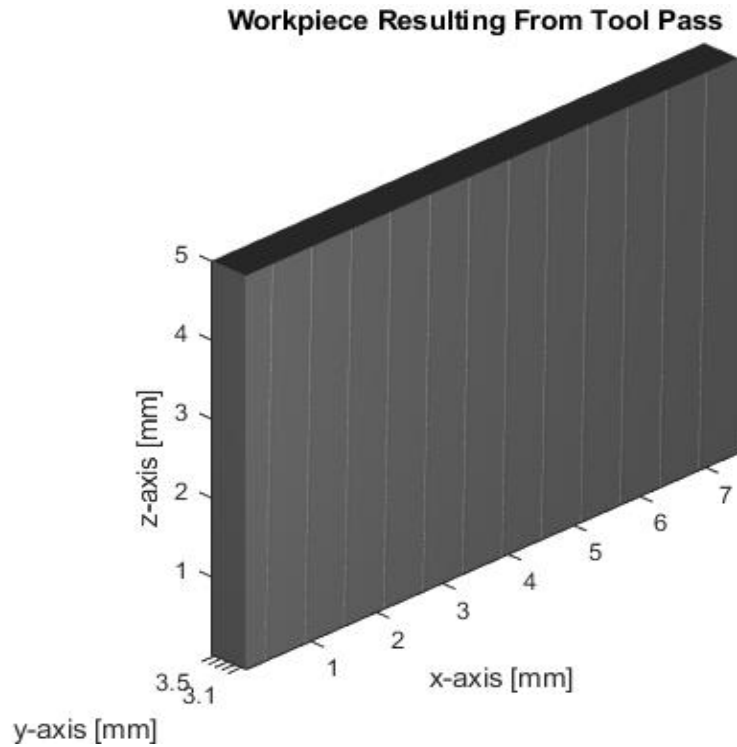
Workpiece resulting from the motion of the 30 mm tool run at 0.6 mm/tooth. The higher frequency of the wavy surface is due to the slower feedrate of this scenario.
